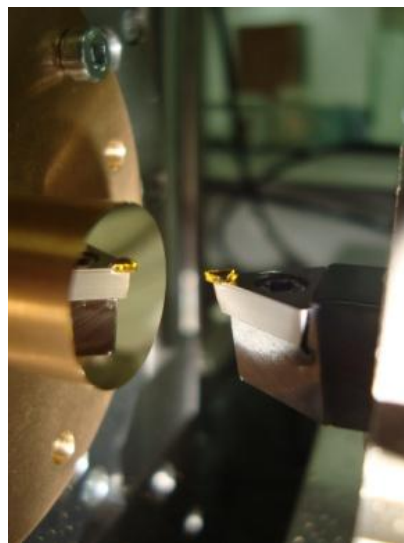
Flat machined brass workpiece with tool tip reflection
